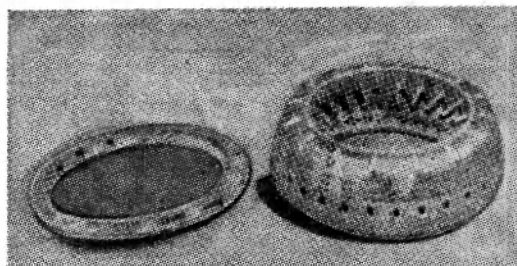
Two of the Artouste parts Vacuum brazed. 1 stage diffuser. (left) Bosses and the bottom plates are copper brazed. Combustion Chamber outer shell Assembly (right). Dilution tubes are Vacuum brazed to the outer shell.
